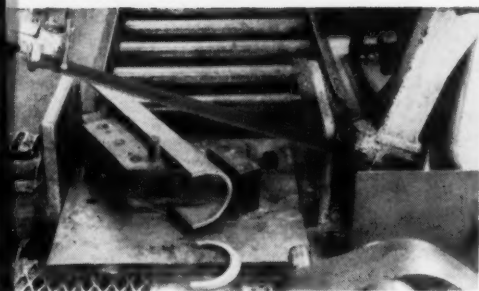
Close-up view of fixture used for cutting doubler prior to "cropping" cut.
